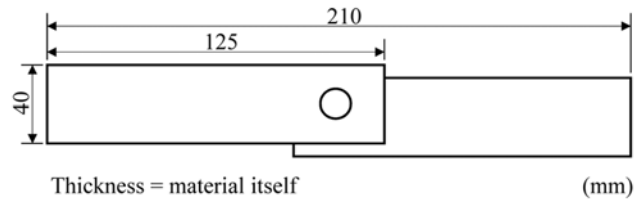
Schematic drawing of the test specimen of spot welding (DP590 1.4 t, Al 5052 1.5 t)
